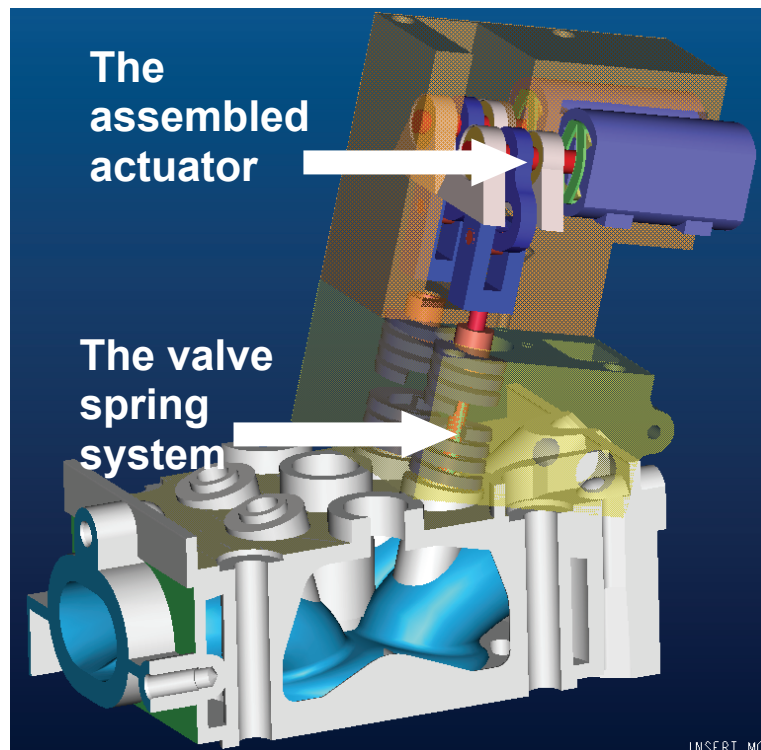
SolidWorks® illustration of the EMV system mounted on an engine head.
